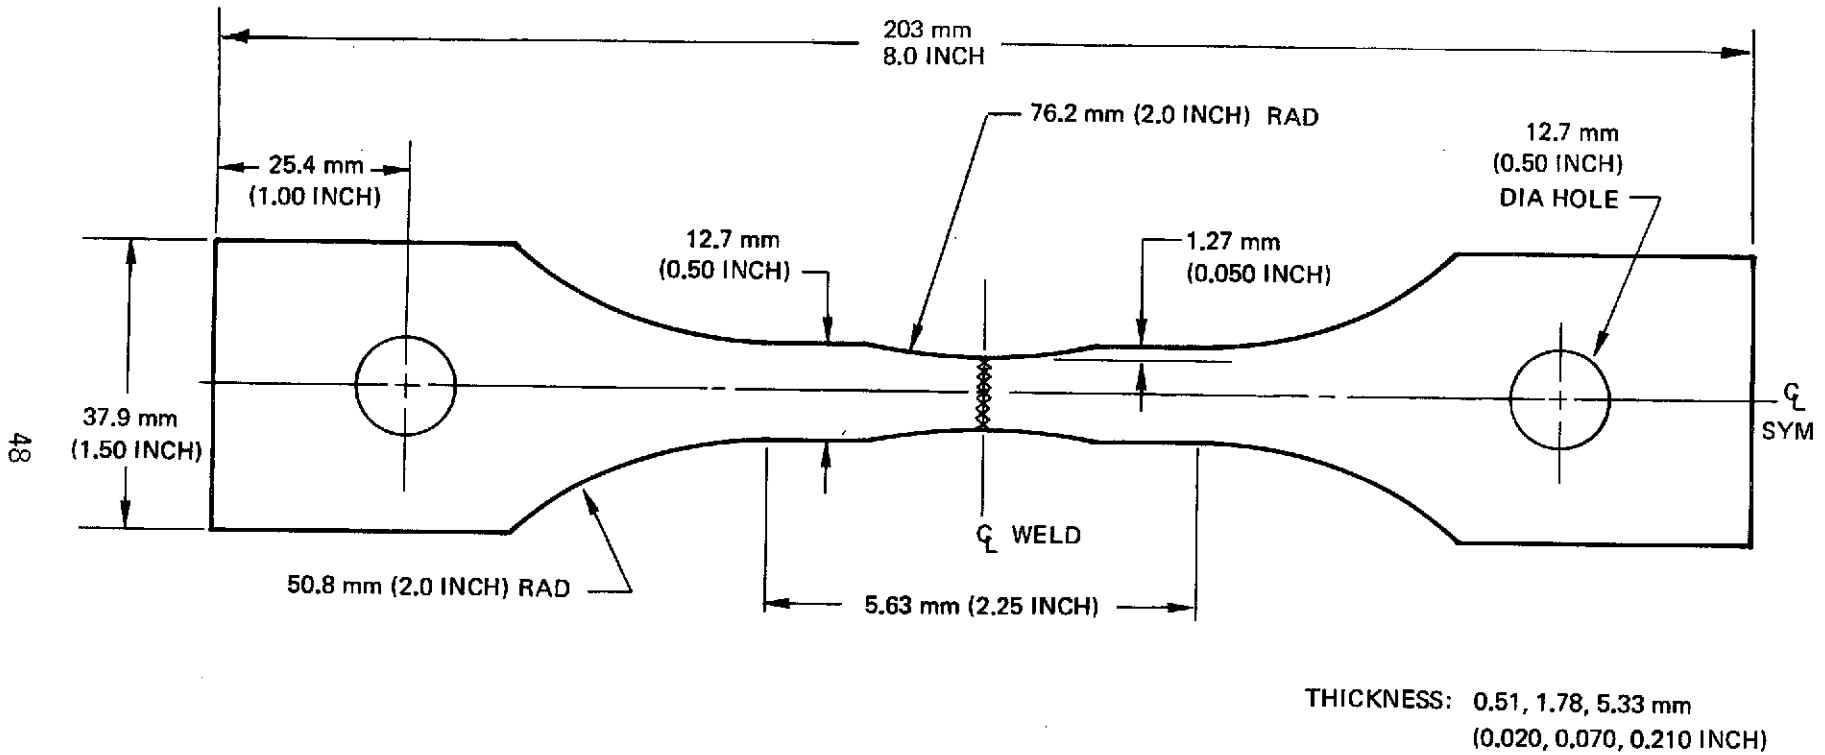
6AL-4V TITANIUM ALLOY WELDMENT TENSILE SPECIMEN
